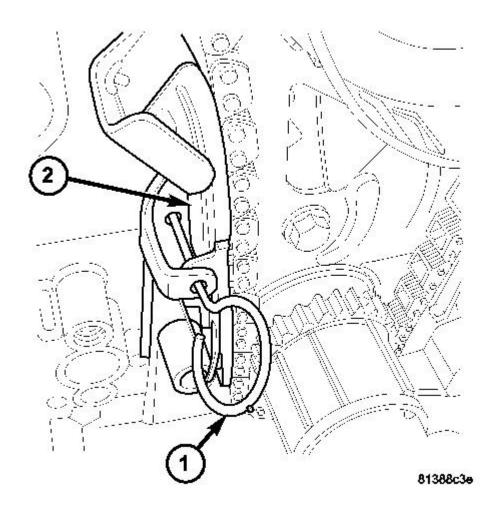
Tensioner Pin Courtesy of CHRYSLER LLC
